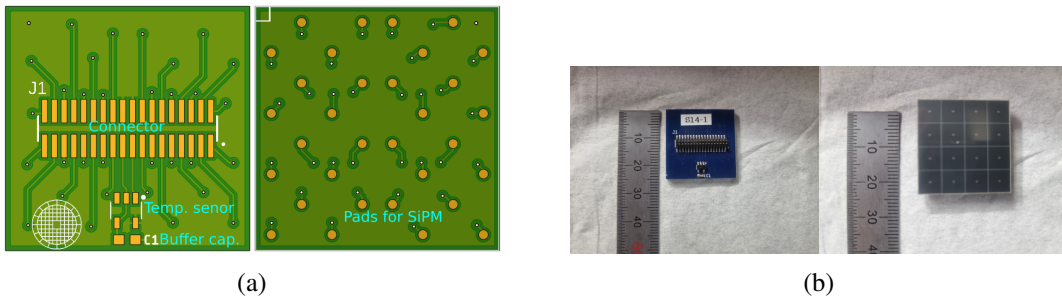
S14161-6050HS-04 SiPM PCB. (a) shows a rendering of the SiPM PCB for S14161-6050HS-04 with labels of the elements of the PCB. (b) shows the SiPM soldered on the board alongside the other components.
